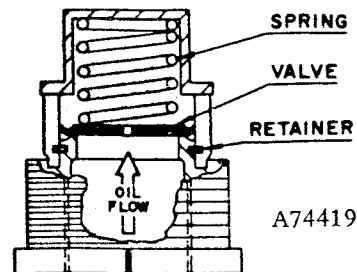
OIL FLOW CONTROL VALVE
